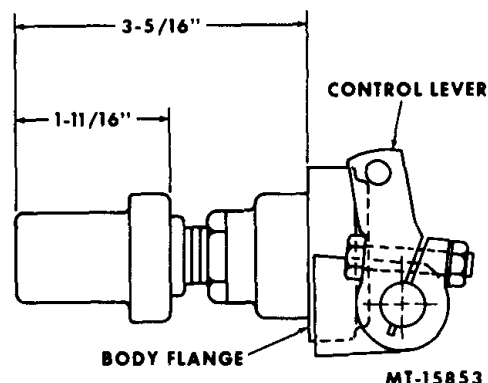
Shutter Control Thermostat Unit Adjustment.
